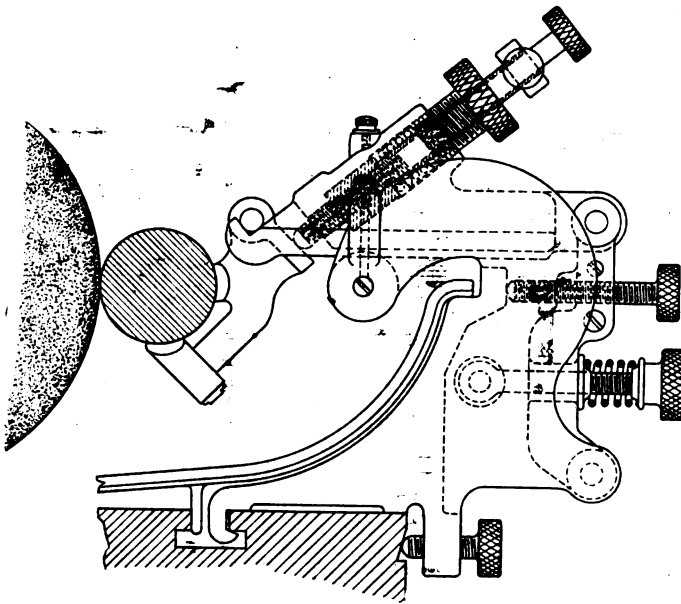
A form of back rest used in cylindrical grinding. (Brown & Sharpe design)
